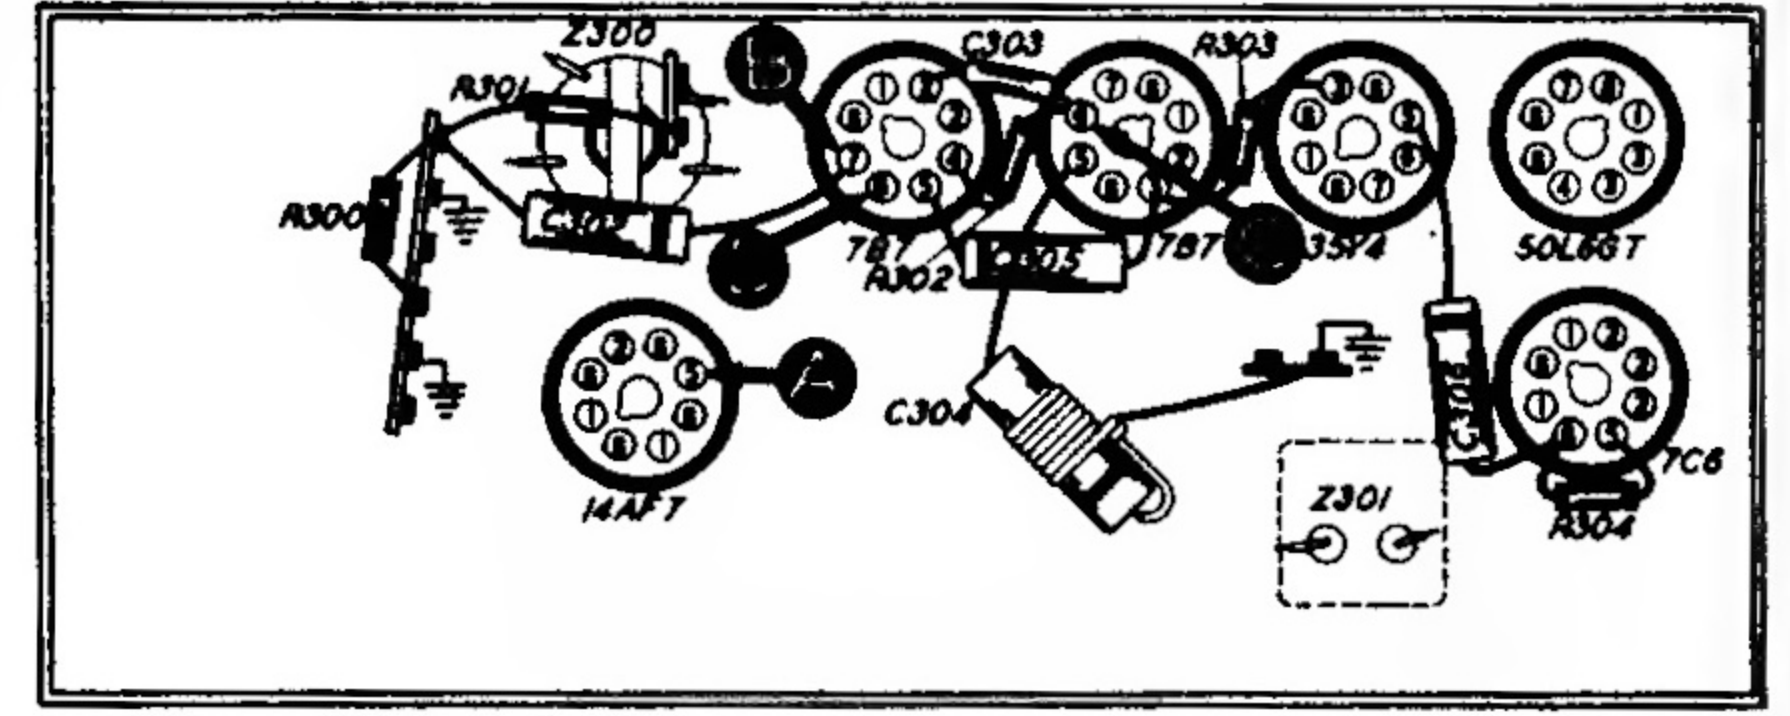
BOTTOM VIEW, SHOWING SECTION 3 TEST POINTS
